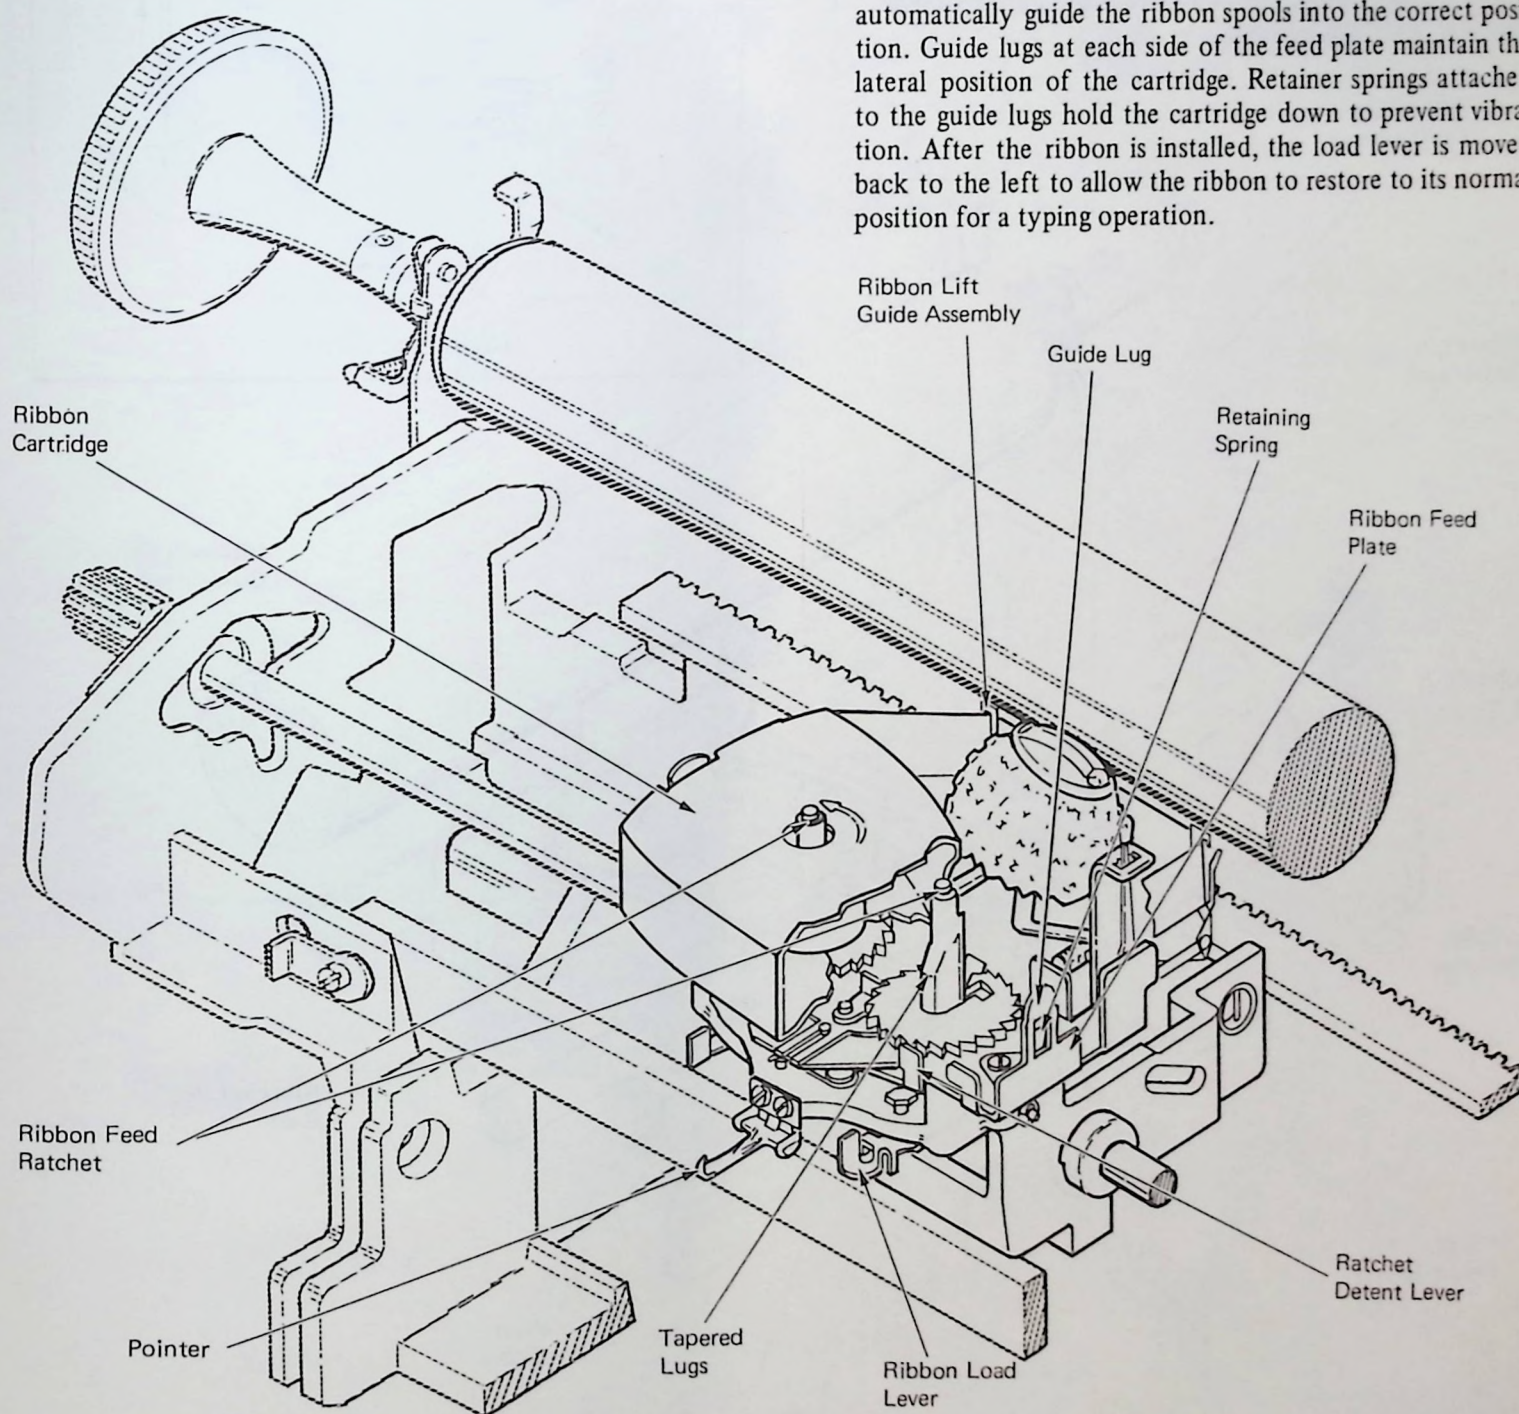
Carrier Assembly (Fabric Ribbon Installed)
